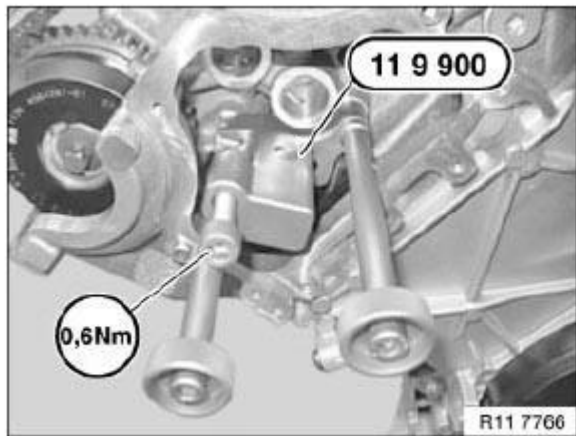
Identifying Hexagon Socket Screw With Special Tool
